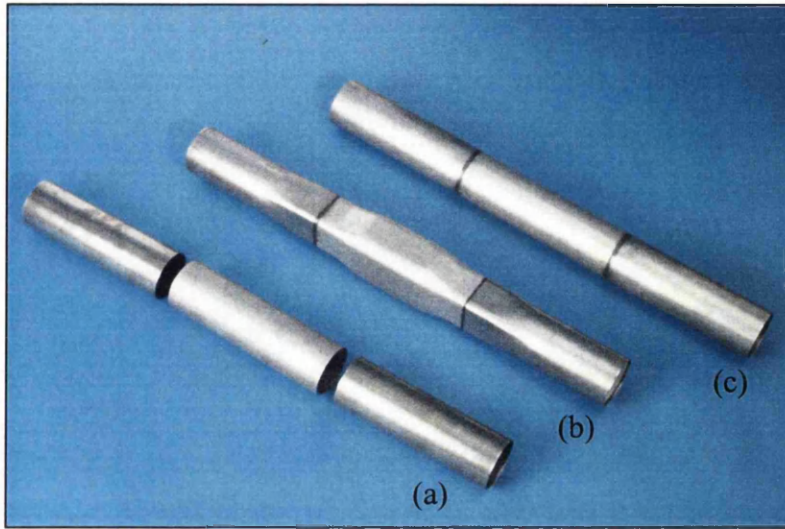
Photograph of FeP04 (70x1.5mm) : SS 304 (70x1.5mm) : FeP04 (70x1.2mm)
